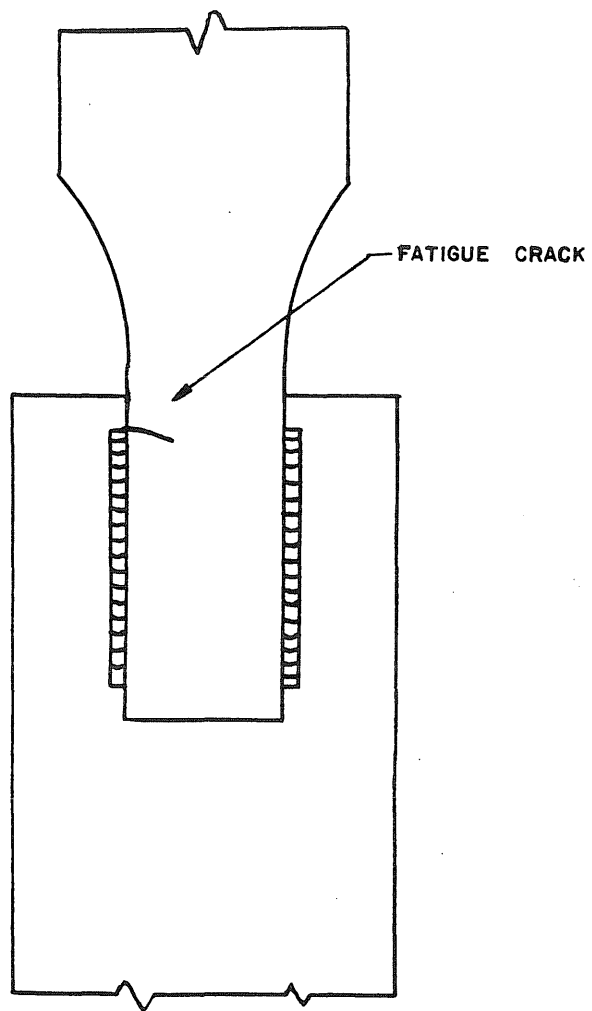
FIG.II SKETCH OF LOCATION OF FATIGUE FAILURE
